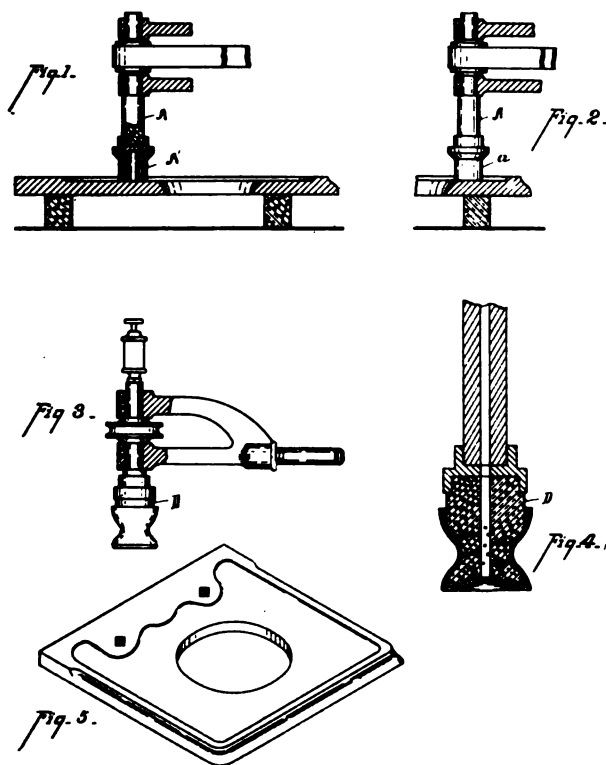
is a similar view showing a device for effecting the finer grades of gritting and dressing. Fig. 3 is a side elevation of the polishing-spindle. Fig. 4 is an enlarged central vertical section of the same. Fig. 5 is a perspective view of a washstand-top showing the character of work to be accomplished.
